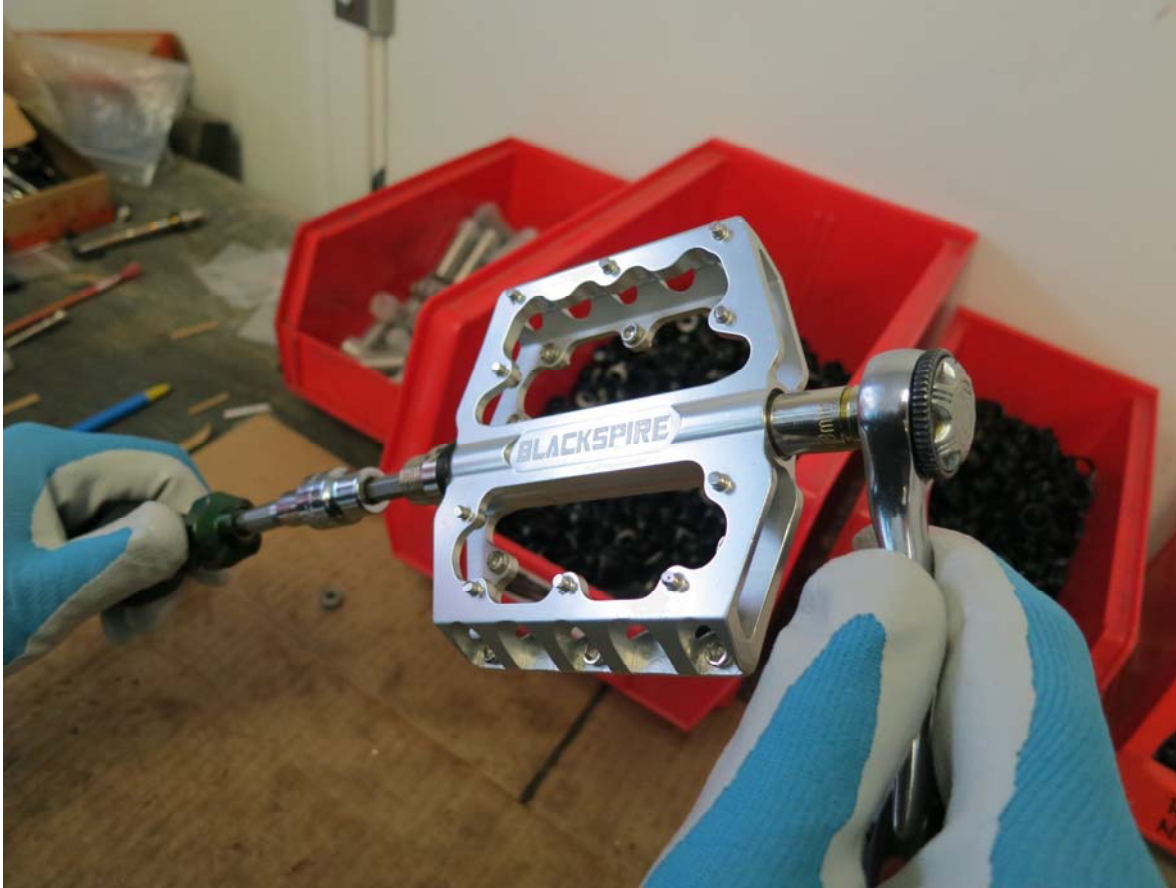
Tightening the pedal axle nut onto the pedal axle to the torque specification of 4 Nm.
